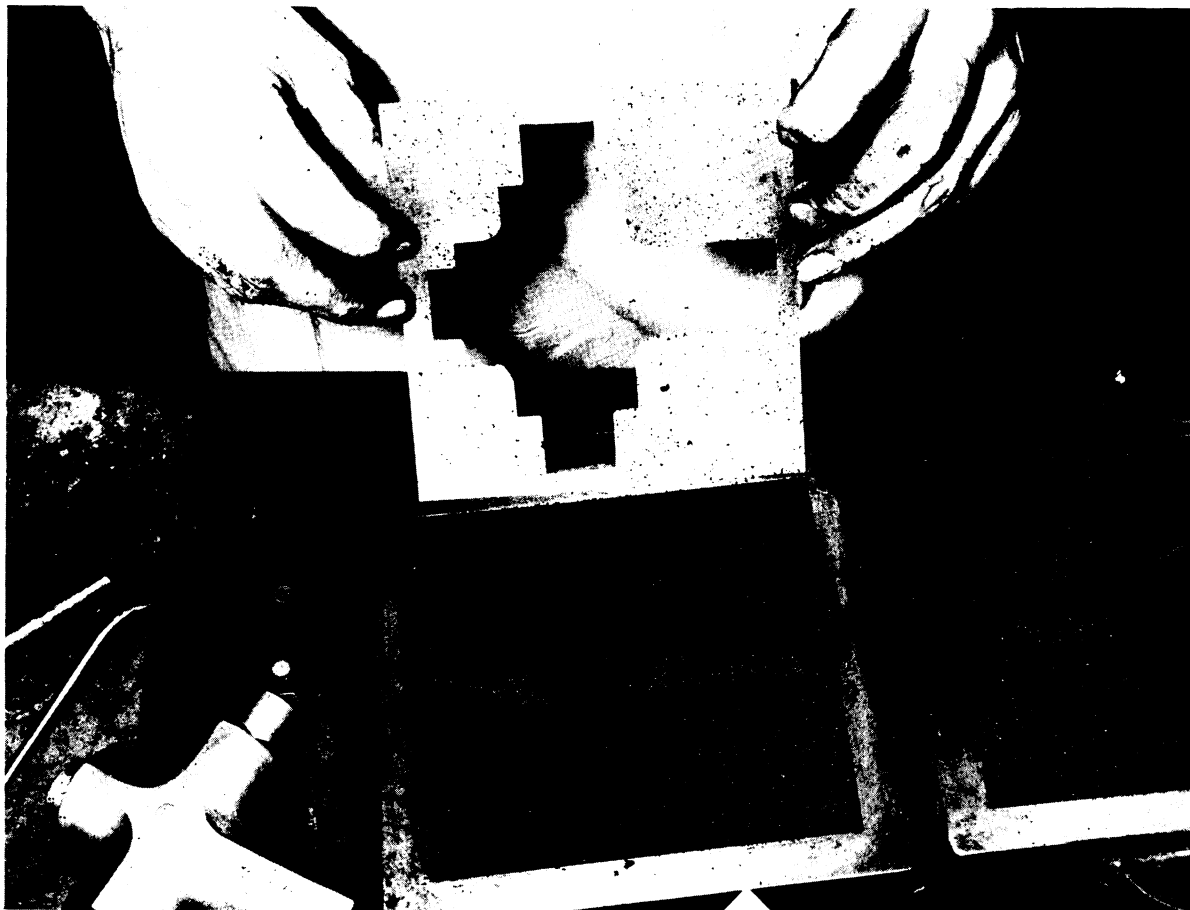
Metal shim stock is removed after the mold has been rammed.
